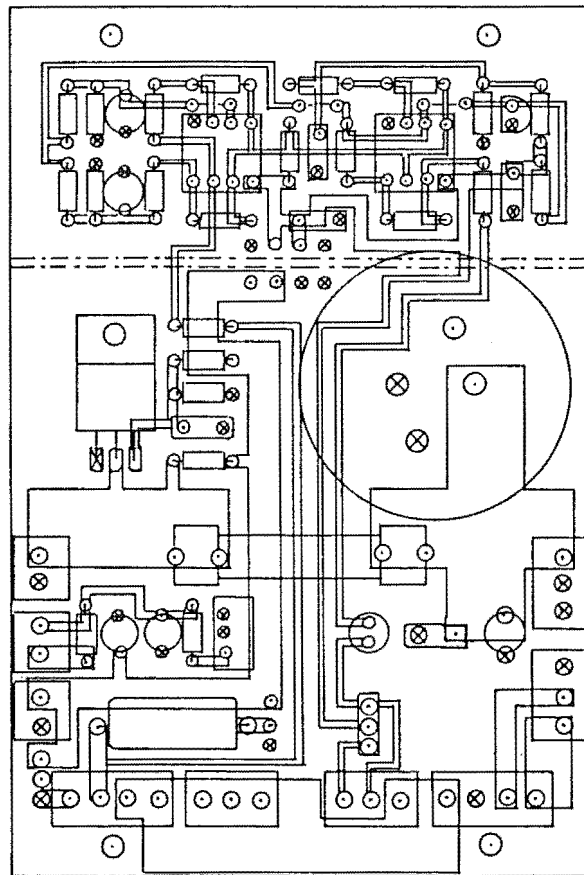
Printed circuit board layout for a pre-regulator circuit.
